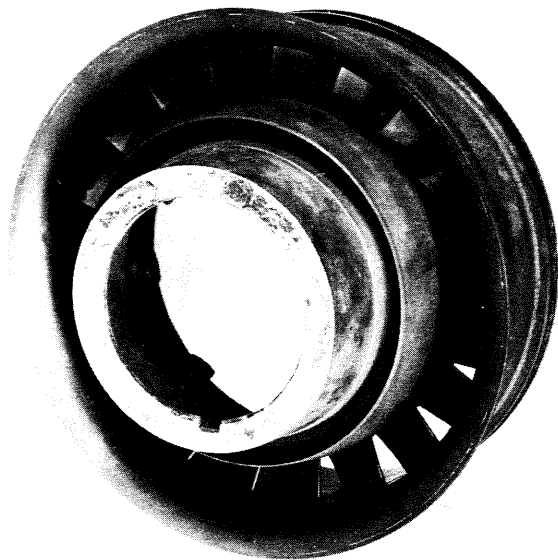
Gas Generator Turbine Nozzle Assembly
